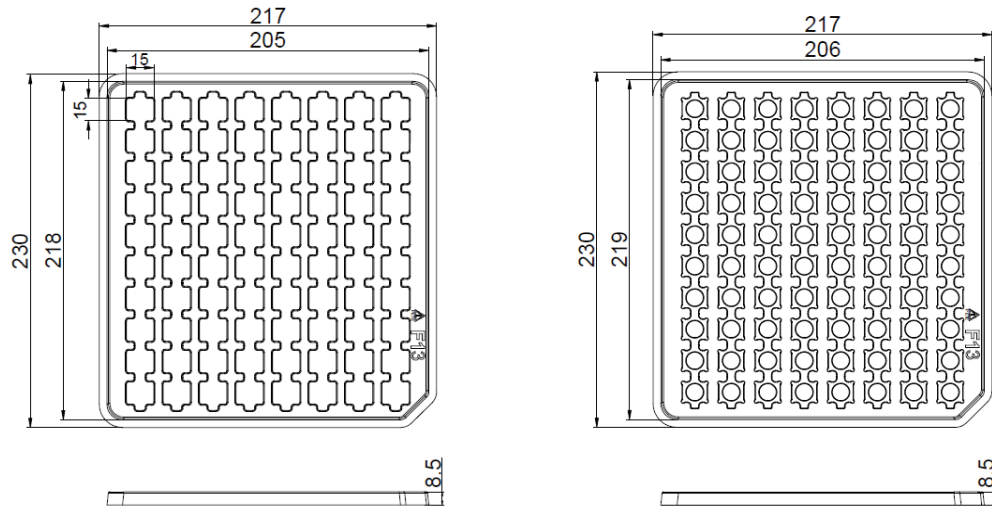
Tray dimensions for L2C6-xxxxxL02x0600, L2C6-xxxxxL02x0900, L2C6-xxxxxL04x0900.
